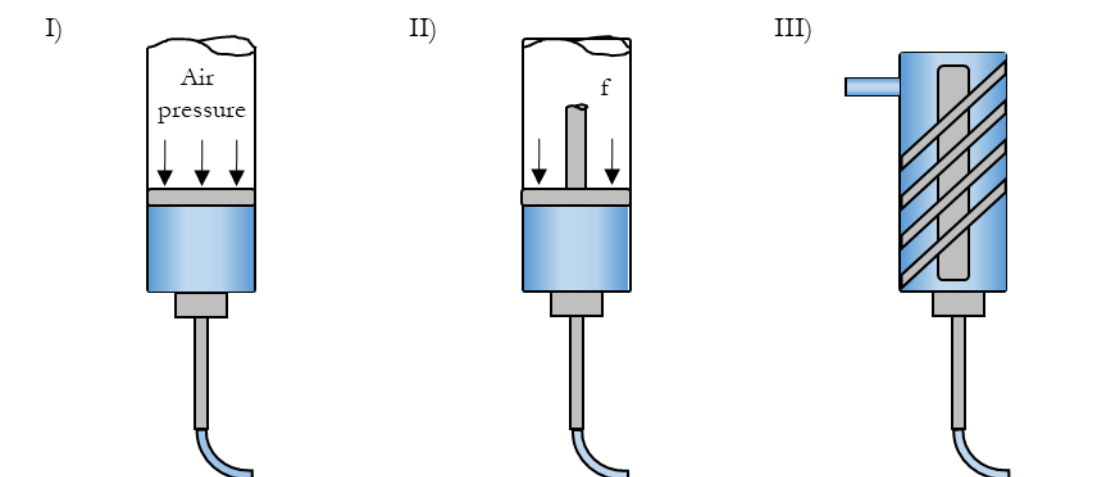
Graphical illustration of the extrusion mechanism for DIW 3D-printing: I) pneumatic pressure based, II) piston based and III) rotating screw based
